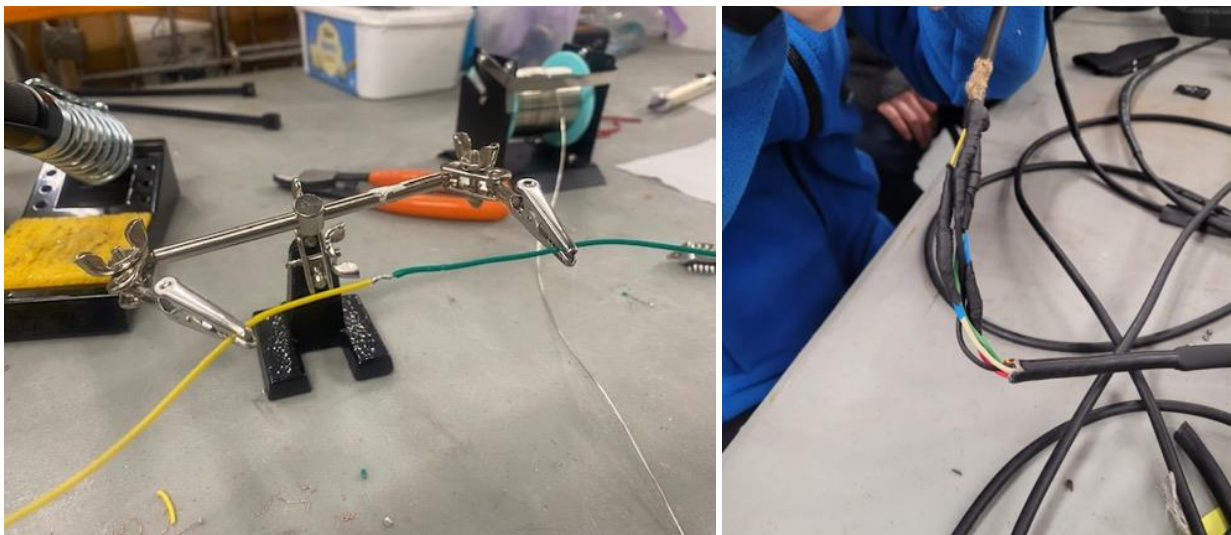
Learning to solder (left) and after soldering and fixing Jens Didrik Berg's cable (right).
